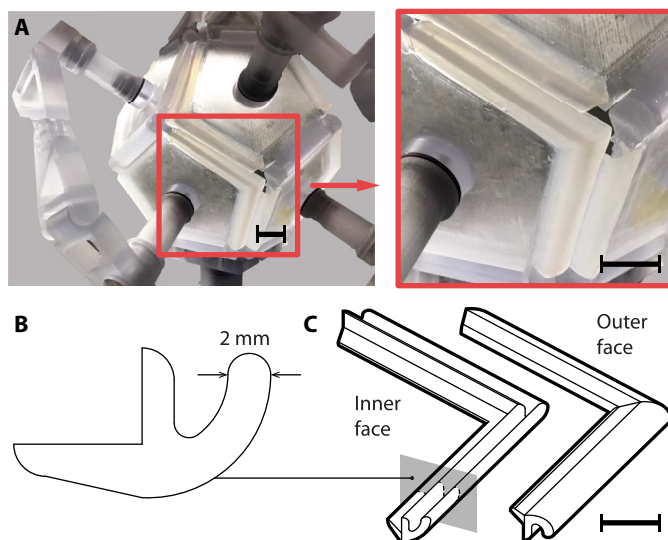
Details of seal design. (A) RAD sampler (left), with close-up view (right) indicating the soft edges that form the light seal. (B) Cross-sectional shape of the gasket with curved cantilever design used to minimize deflection forces and accommodate alignment variance. (C) Inner and outer faces of one of three gasket shapes made (with the same cross section) to cover the RAD sampler panel edges. Scale bars, 15 mm.
